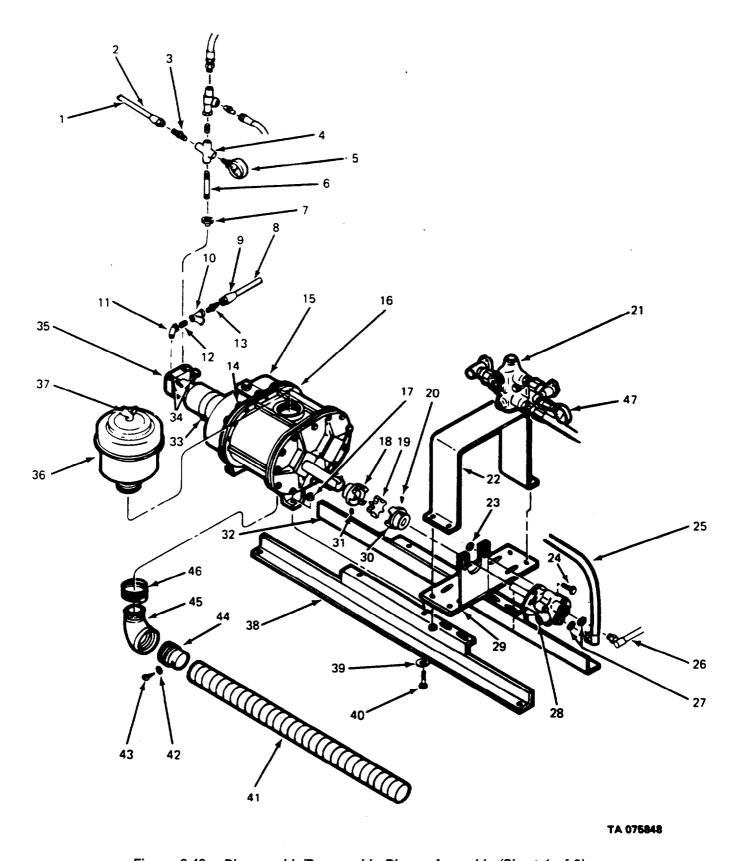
Disassemble/Reassemble Blower Assembly (Sheet 1 of 2).
